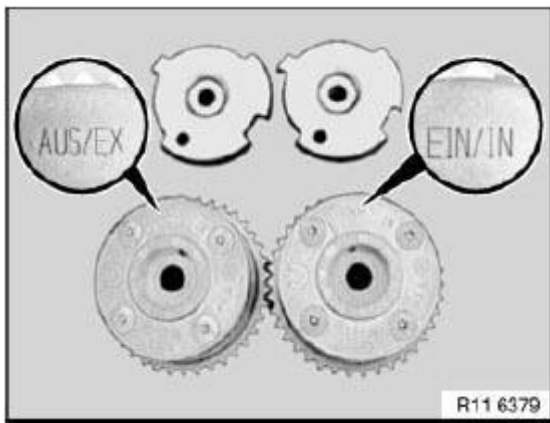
Identifying AUS And EX Marks For Exhaust Camshaft
